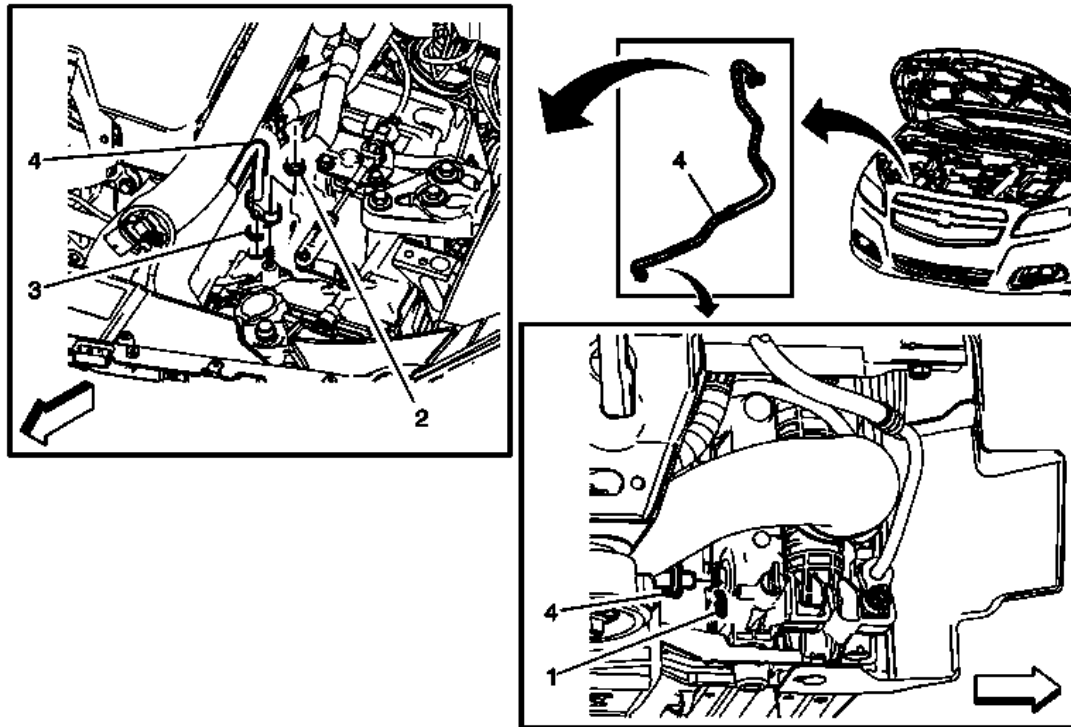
Transmission Fluid Cooler Inlet Pipe & Components (LTG)
